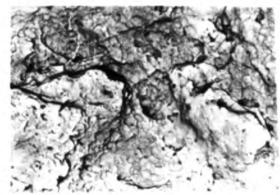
6,000X FATIGUE ZONE 2.5 INCHES AFT OF ORIGIN.
